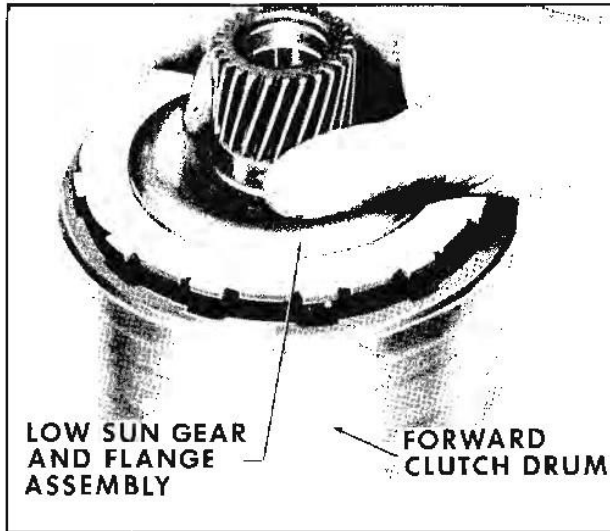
B-71 Removing Low Sun Gear and Flange Assembly
